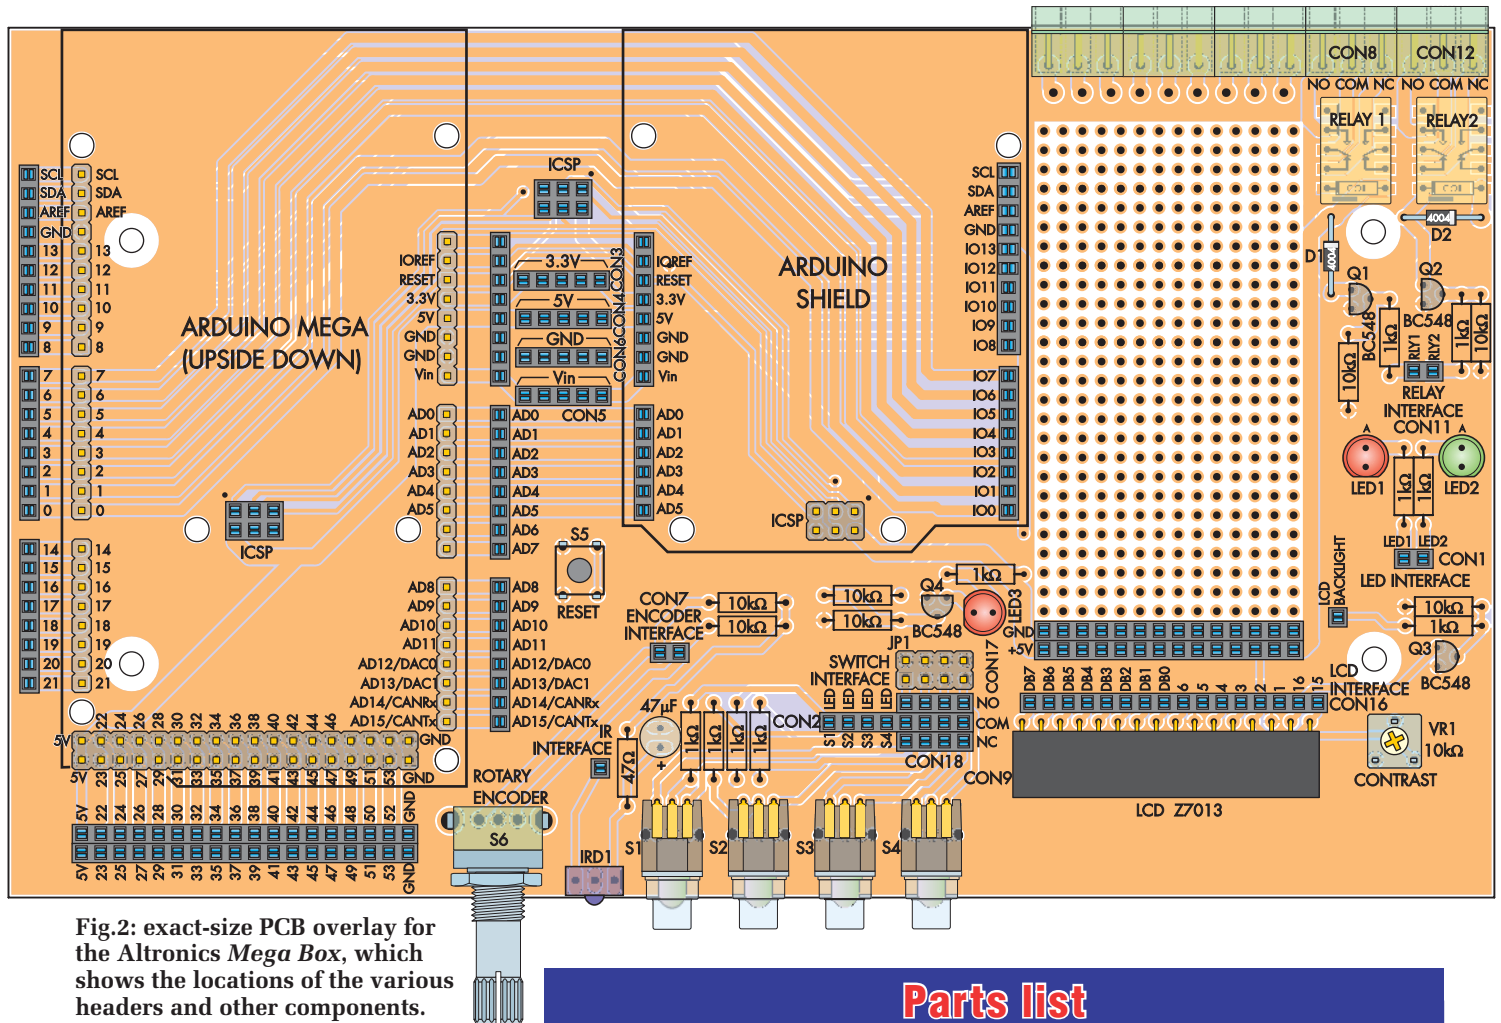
exact-size PCB overlay for the Altronics Mega Box, which shows the locations of the various headers and other components.
